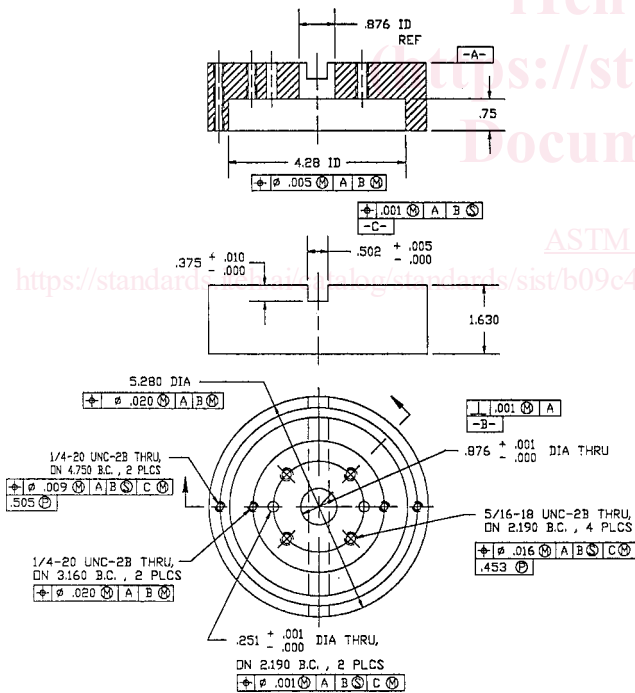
The Outer Shell of the Compression Fixture in English Units
